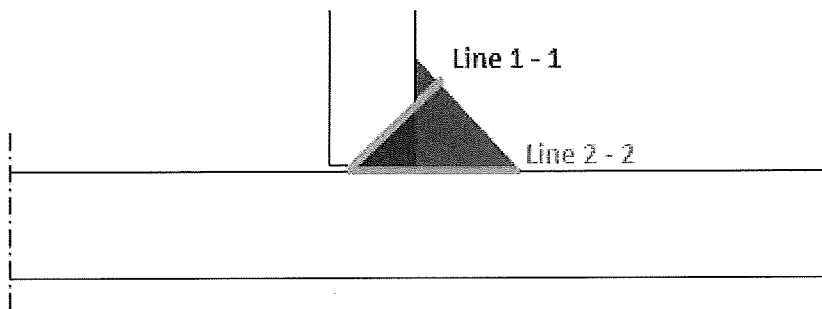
Critical weld throat: partial penetration weld with reinforcing fillet weld (line 1-1) and other critical failure line 2-2.
